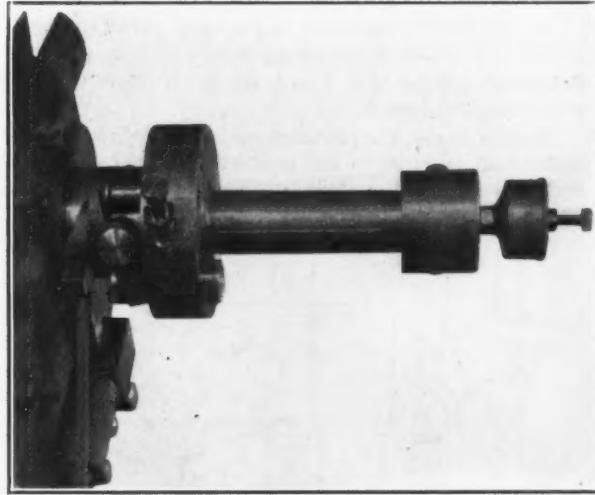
A Detail of the Wheel End of the Shaft and the Clutch.
